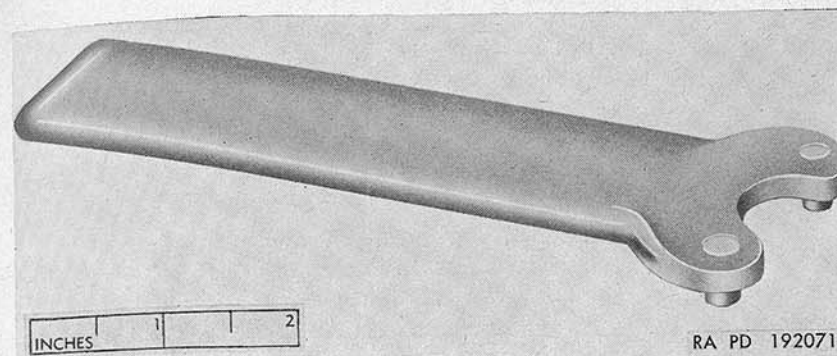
Gas cylinder plug pin spanner wrench—7188579.
